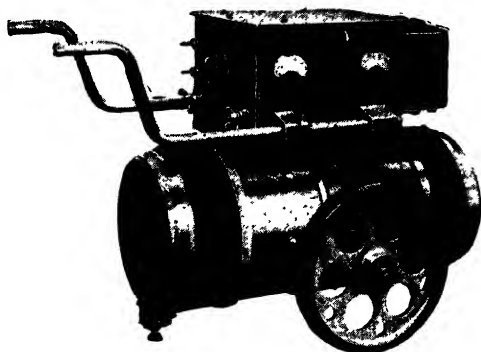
Portable motor generator arc welding set for one operator
